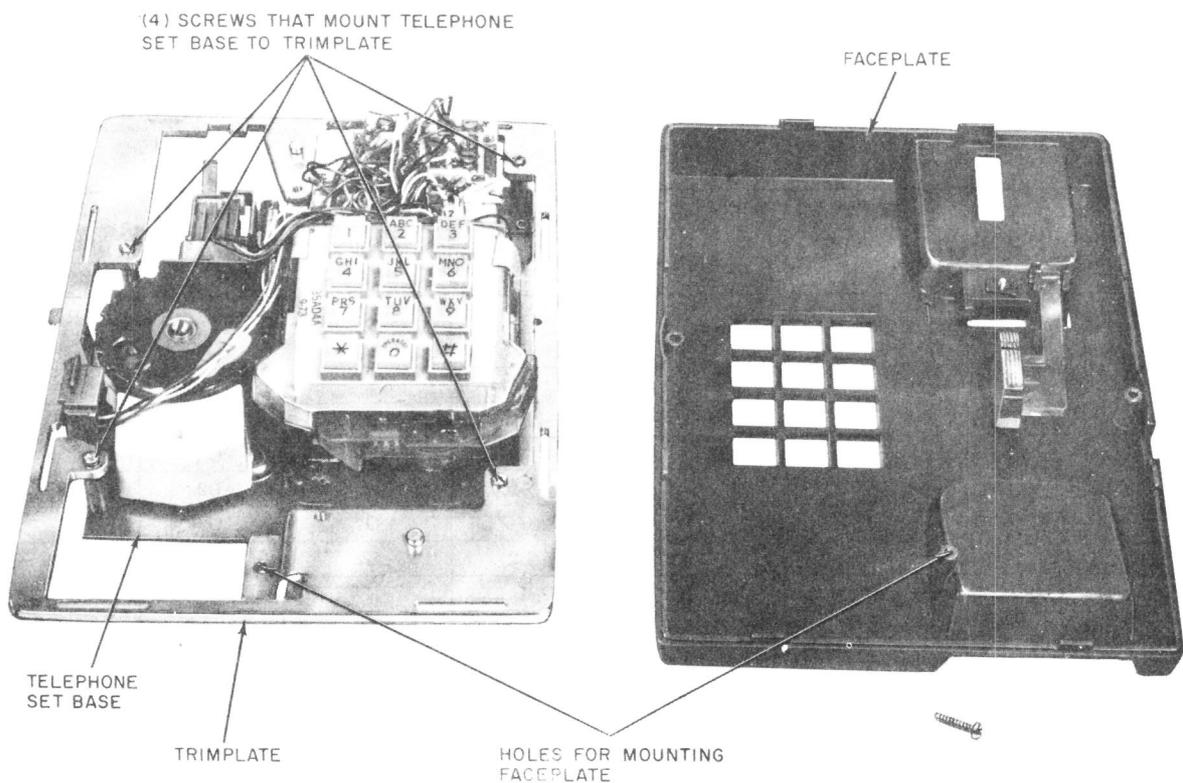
2900A Telephone Set, Less Housing With Faceplate Removed
